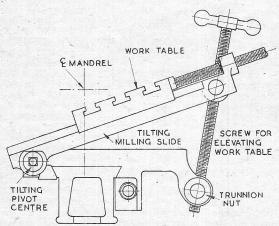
Tilting cross slide provided for milling on Jackson-Rigby lathe
